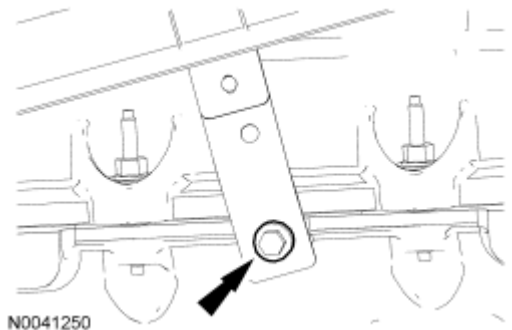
Locating PSP Hose Bracket To Cylinder Head Bolt
